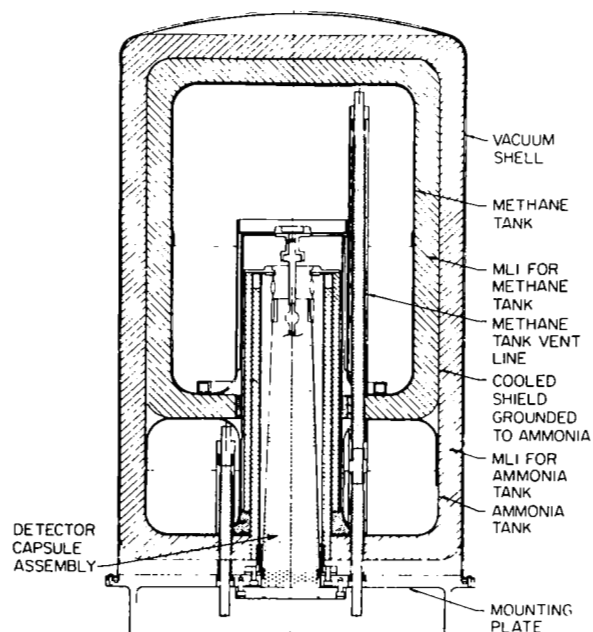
Cut-away view of solid cryogen cooler (built by Lockheed Palo Alto).
